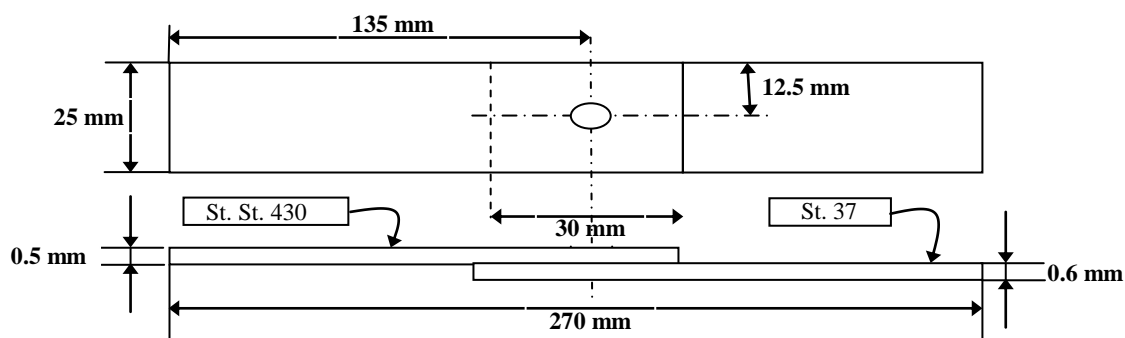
Schematic of dissimilar resistance spot-welded joint.
